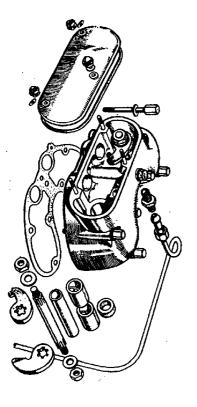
ARRANGEMENT OF ROCKER-BOX ASSEMBLY.
